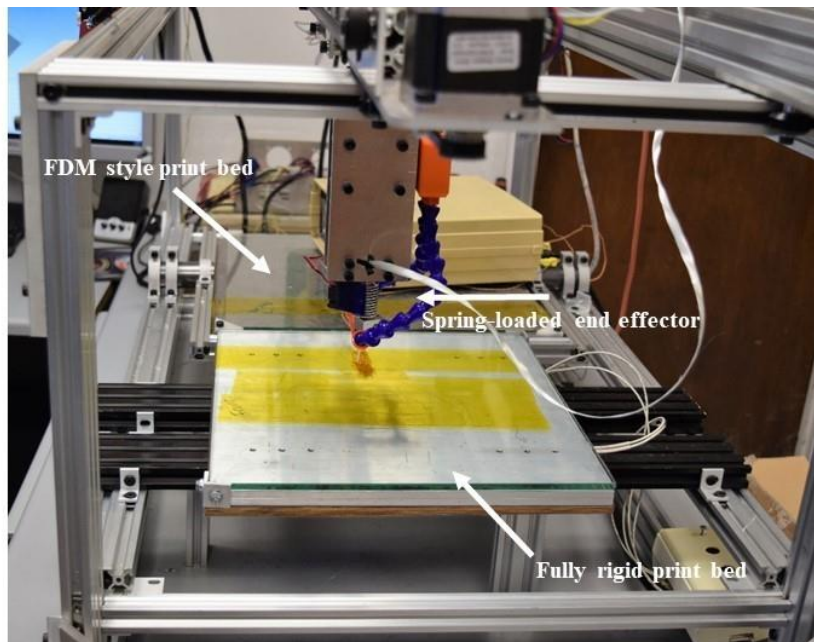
View of the FDM style print bed, the fully rigid print bed relevant to this work and the spring-loaded end effector
